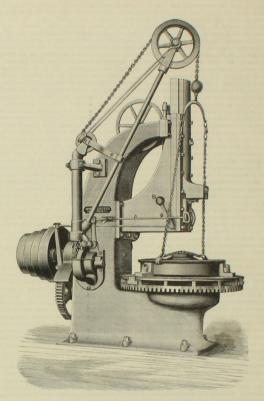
Wm. Sellers & Co.'s New Car Wheel Boring Mill.
